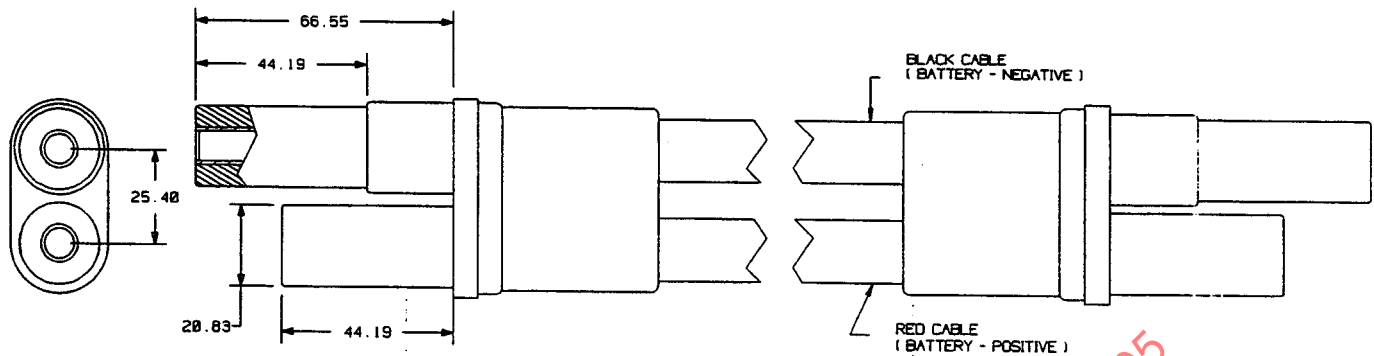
PLUG ASSEMBLY (MACHINE TO MACHINE)
